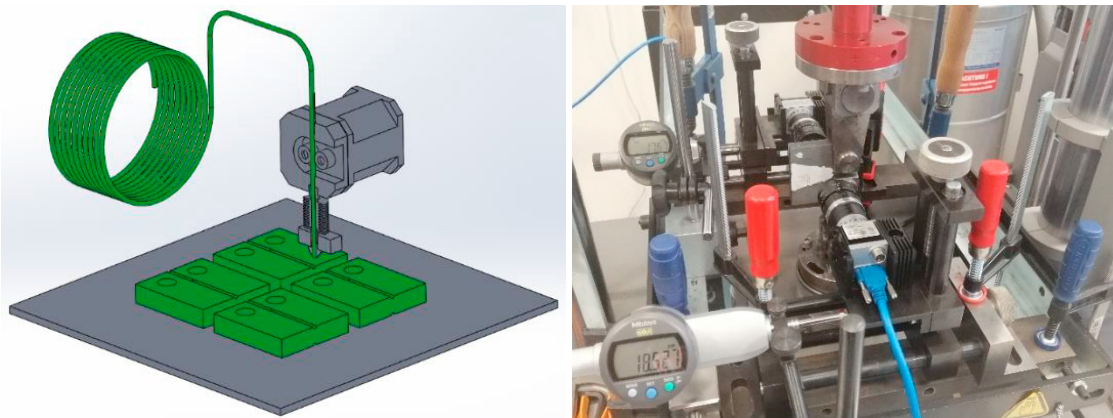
Position of CT specimens on build platform (Left); Fracture mechanical fatigue testing setup (Right).
